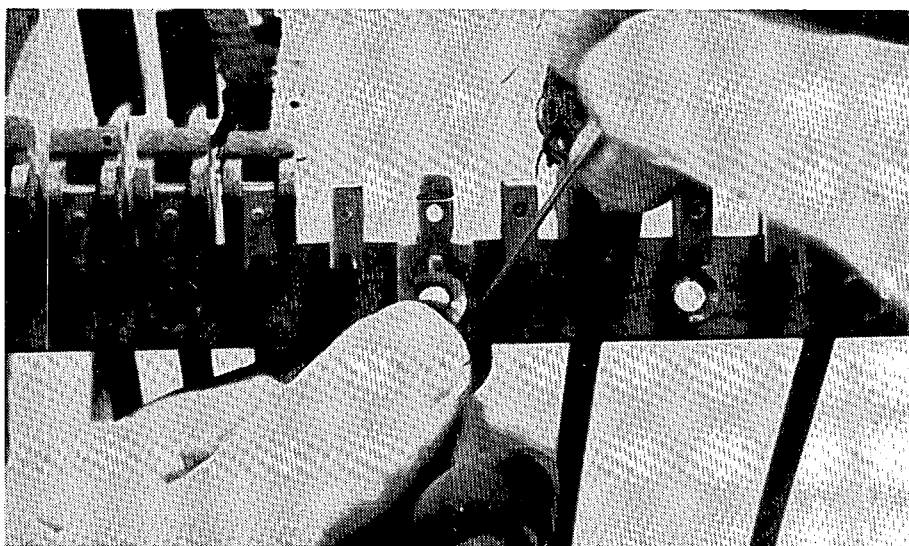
Brass rail mounted in vise. Repair flange in place. Use sharp scriber to scribe lines where rail is to be cut.
